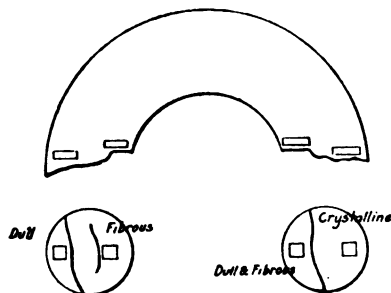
CHARACTER OF FRACTURES IN BURDEN IRON LINK
